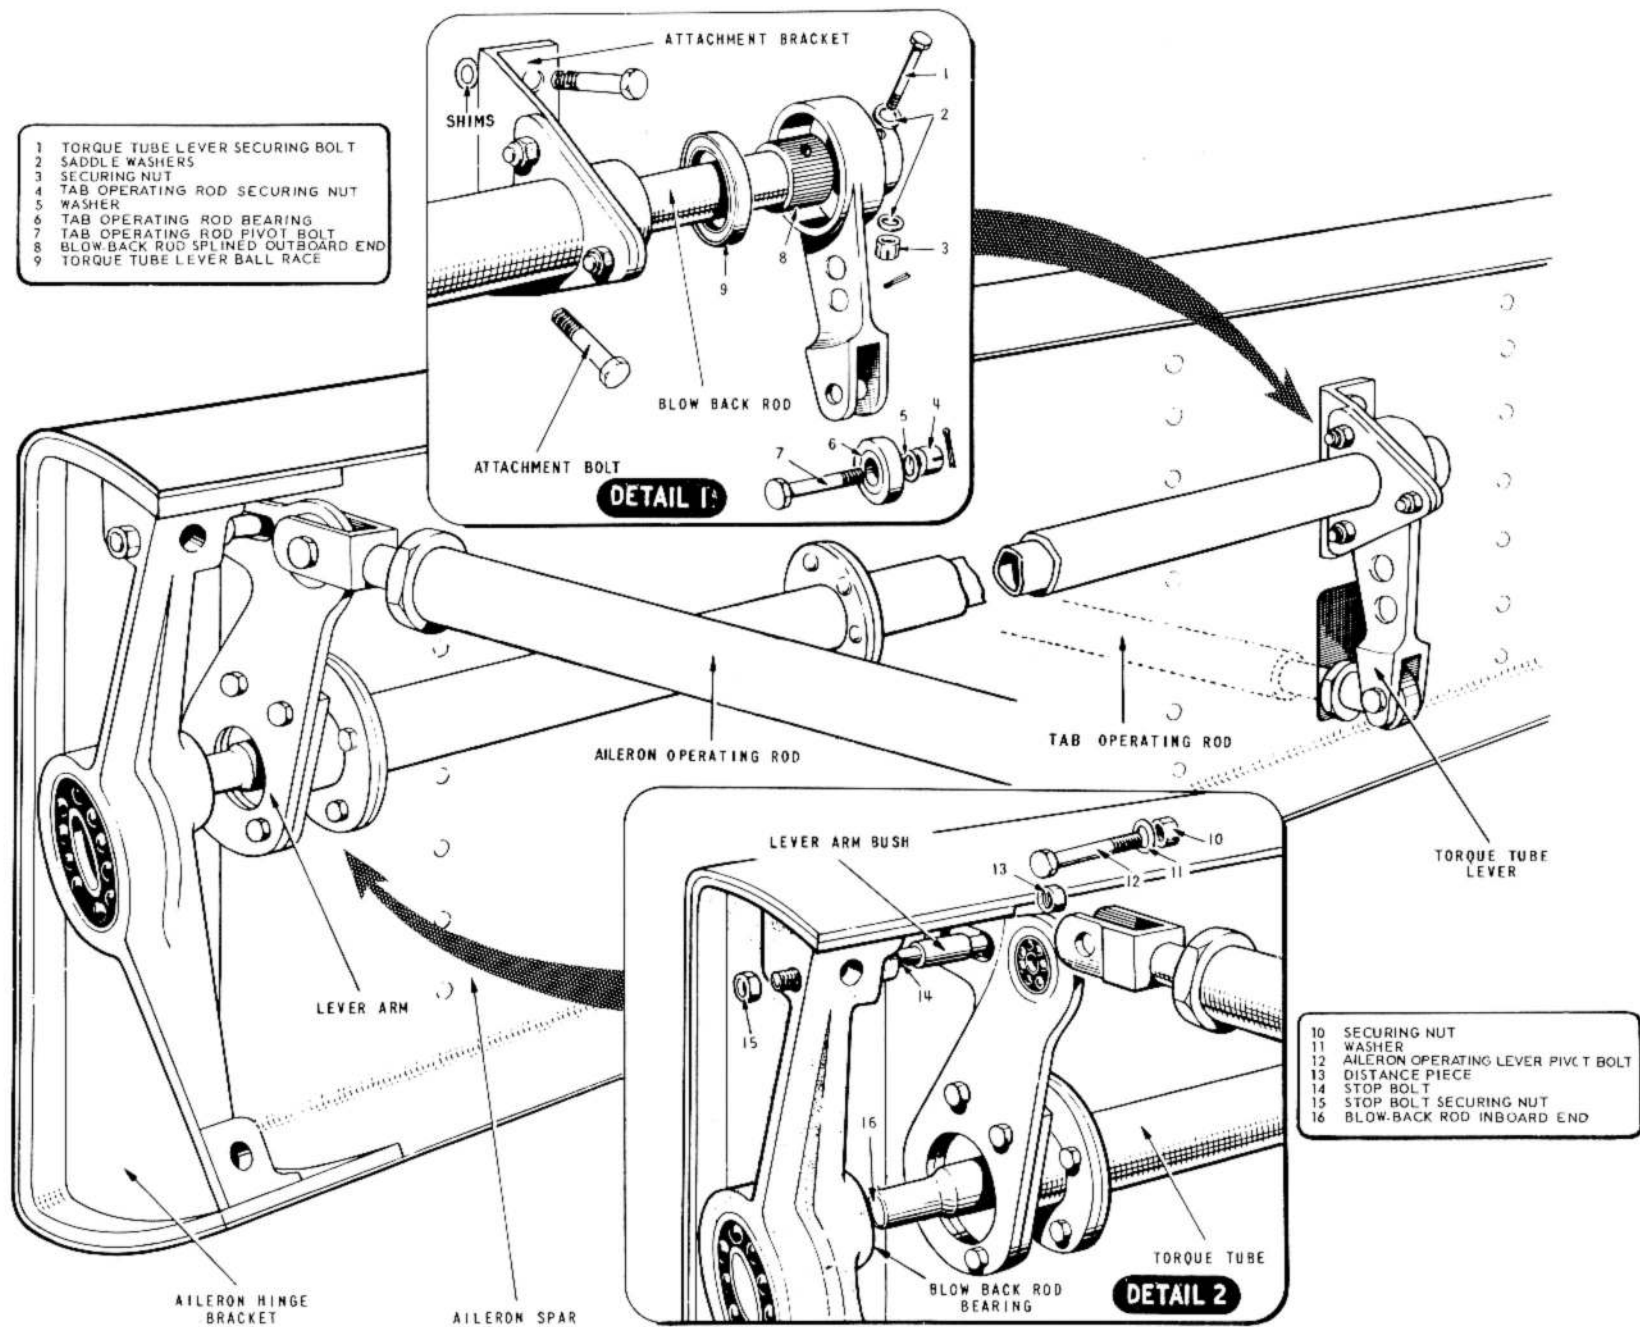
Aileron spring tab mechanism removal (pre Mod.1441)
